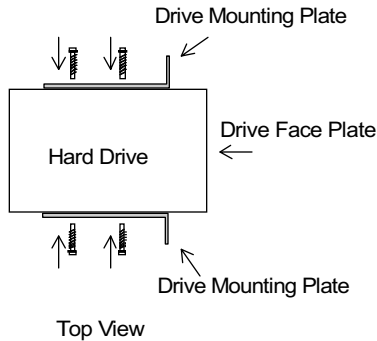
Separating Mounting Plates From Dummy Face Plates
